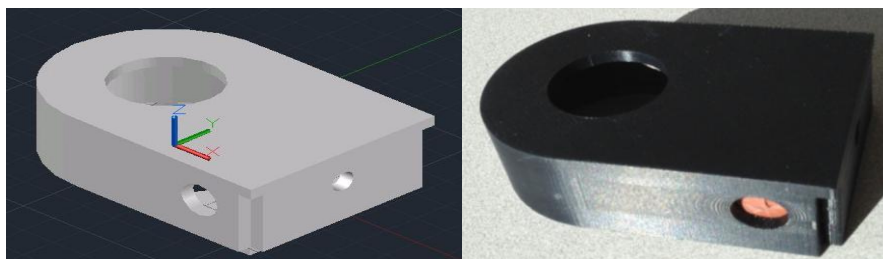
1st prototype of the enclosed box design. On the left, the Auto CAD drawing and on the right is the physical prototype made of ABS plastic.
